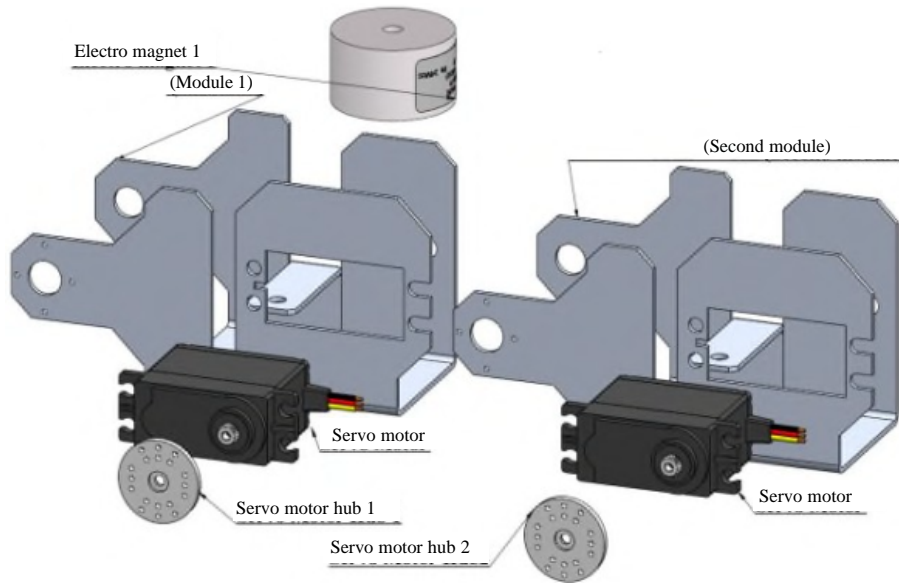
The exploded view of first two modules of the robot assembly is illustrated for understanding the joint module systems and its main accessories
